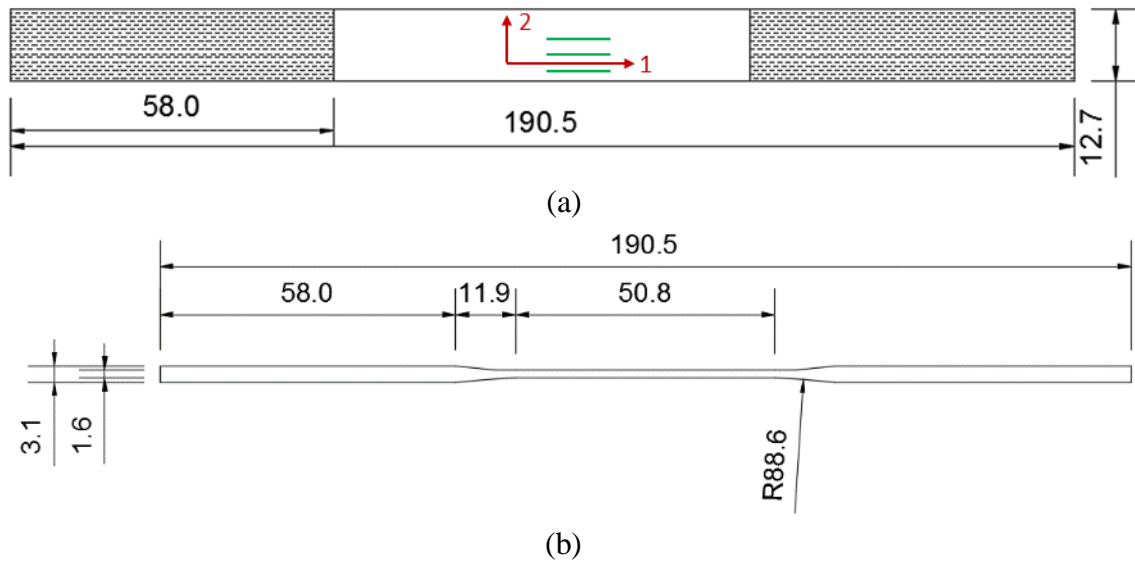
Nominal 1-direction Tension Specimen Dimensions and Layout (a) Plan View and (b) Elevation View (All Dimensions in mm)
